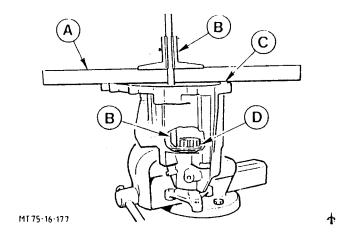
Measure end float (distance from mating face of transfer box to bearing inner race shown in partially scrap side view).
